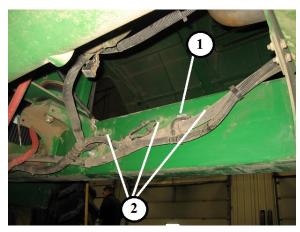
RH Side Mounting Location Key 1 – Hose Mount Key 3 – Wire Ground Mounts
